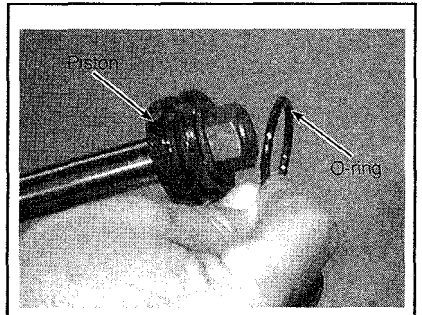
Remove and discard the large O-rings from the end cap and piston
